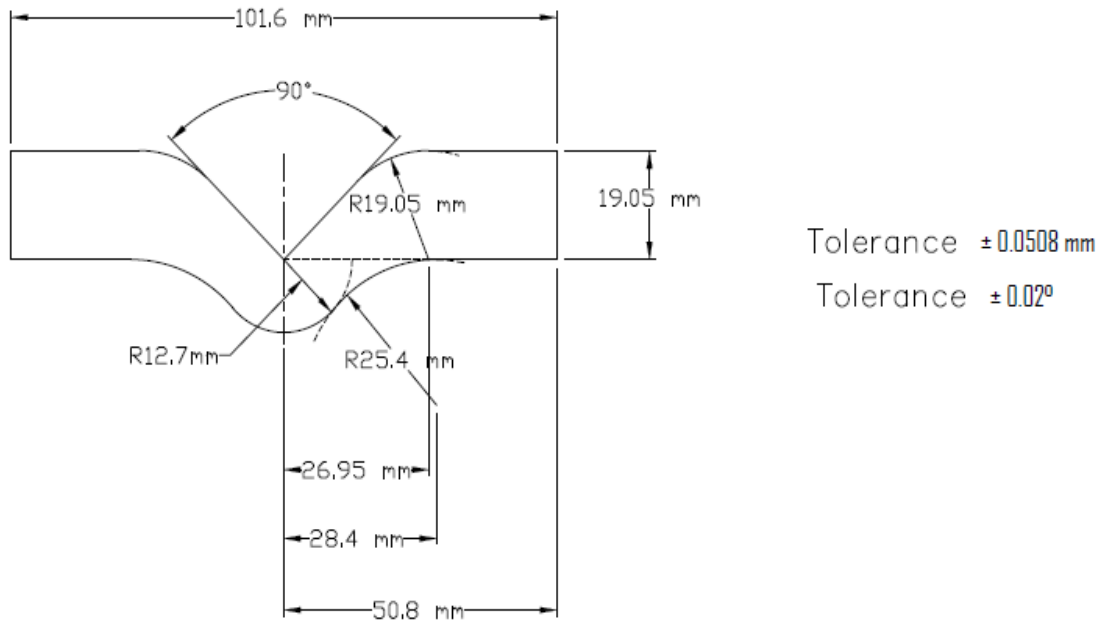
DIE FOR TEAR TEST SPECIMEN
